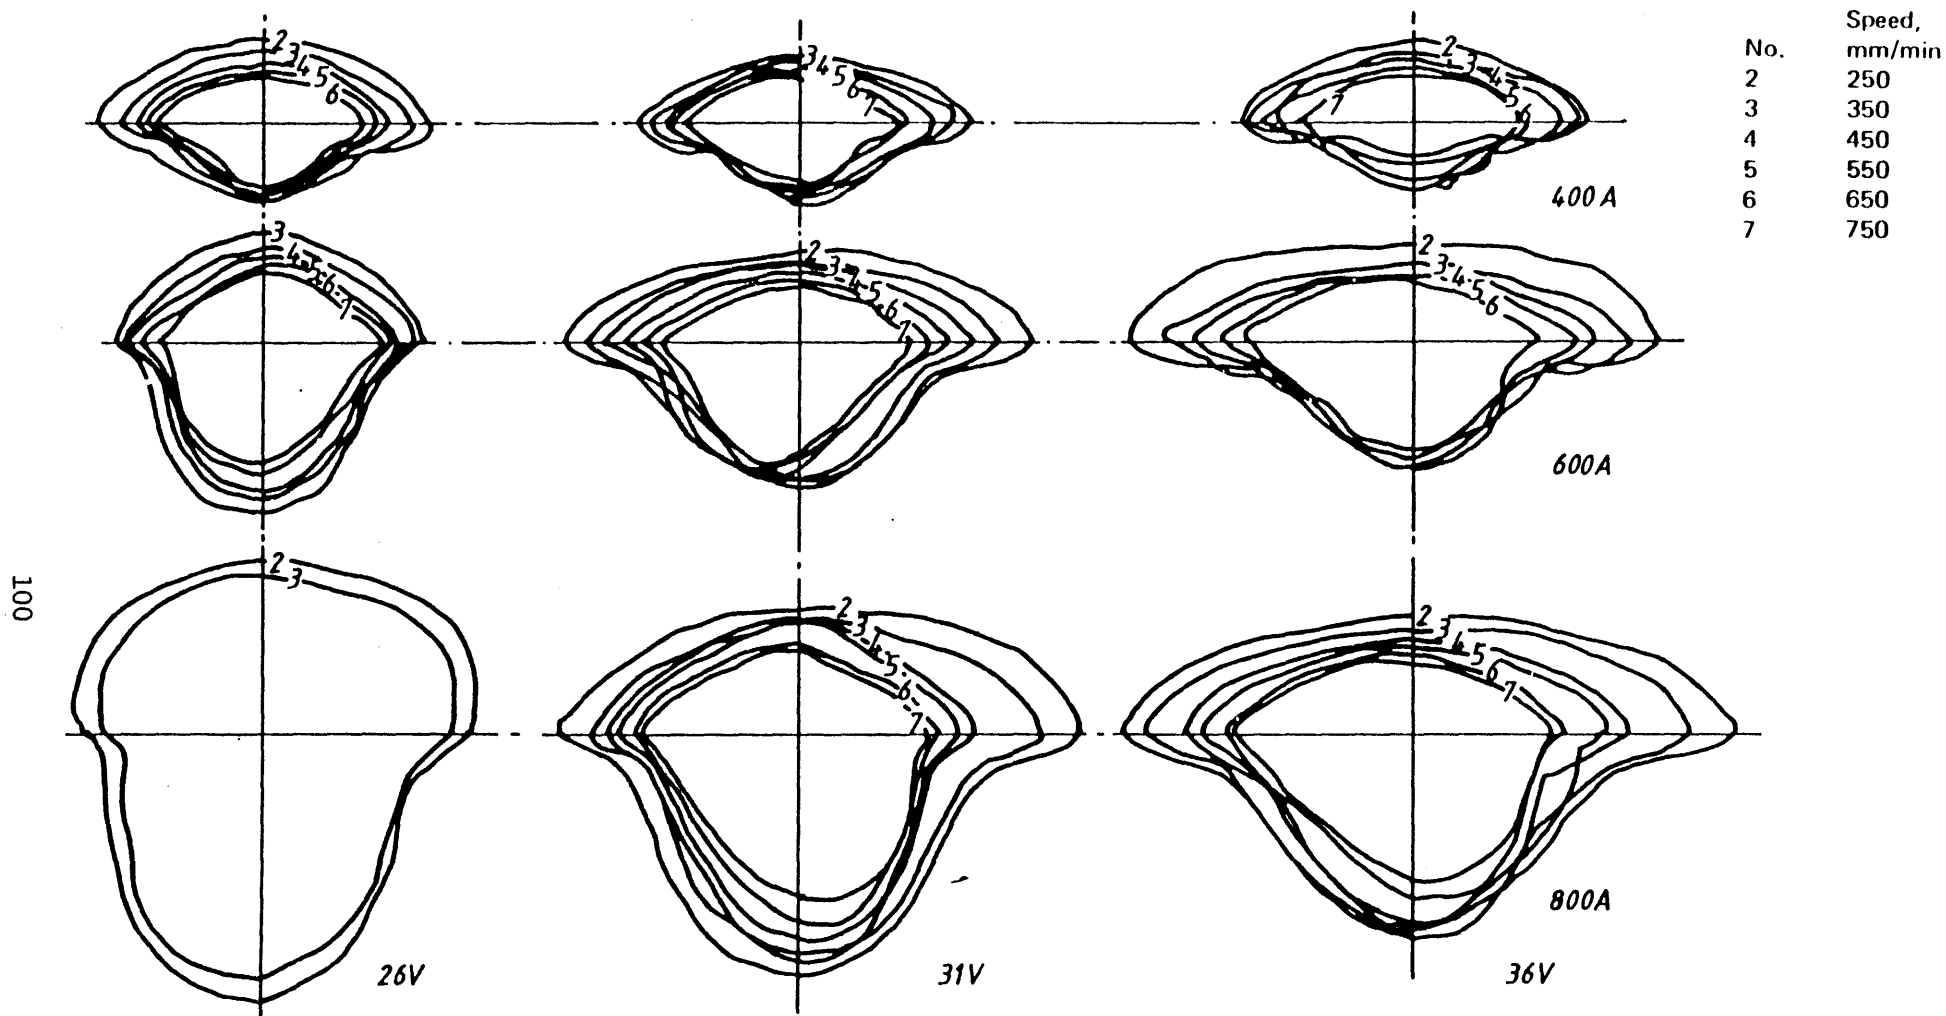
Effect of welding parameters on weld metal geometry. [56]
